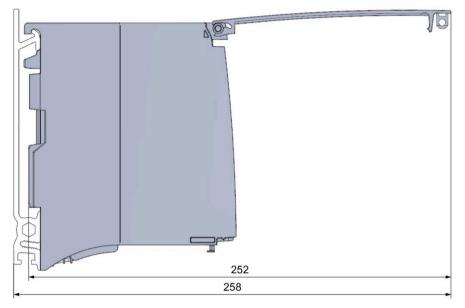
Dimension drawing of the DI 32x24VDC SNK/SRC/DQ 32x24VDC/0.3A SNK BA module, side view with open front cover
